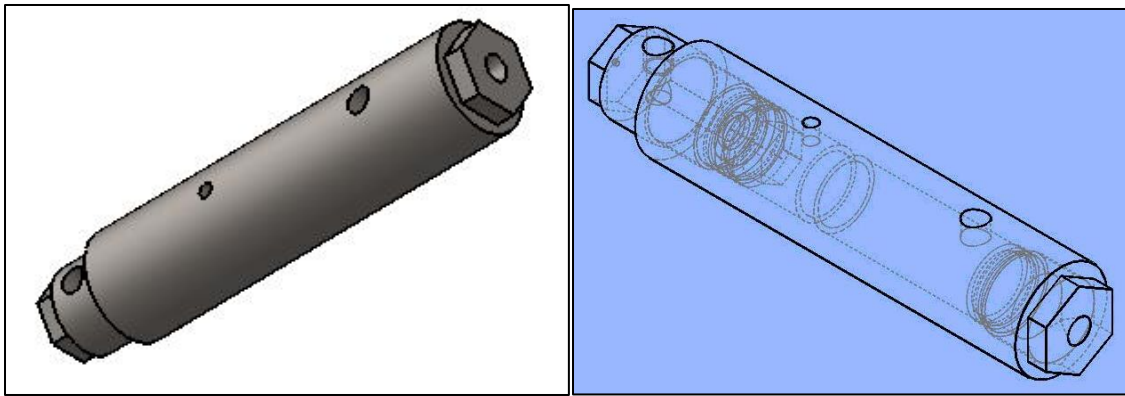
Solid (left) and wireframe (right) Solidworks models of the combustion chamber assembly.
